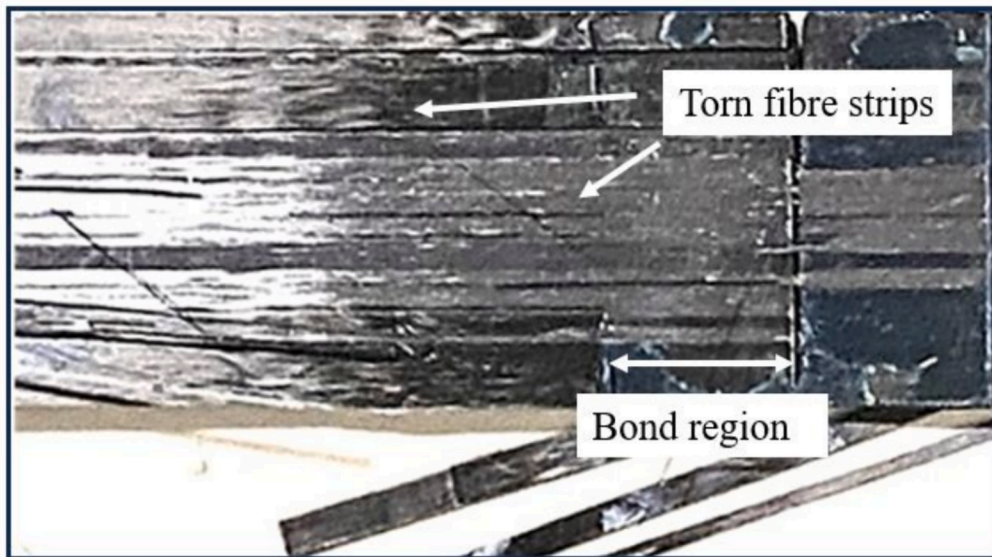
Macro photo showing fractured UV treated sample, the fracture is along the entire coupon.
